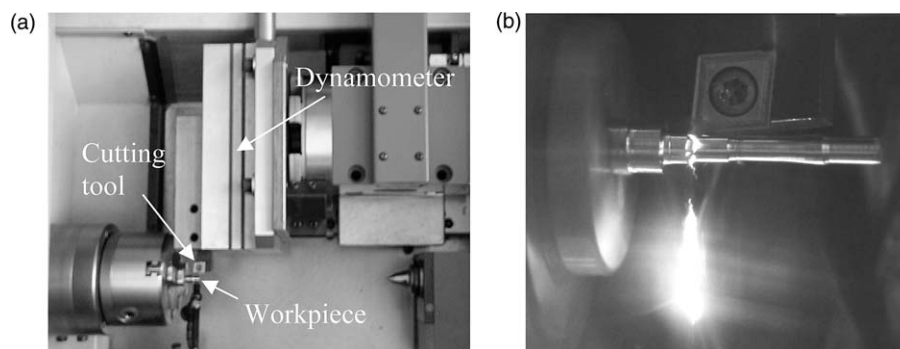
Lathe turning experiment (a) the setup with dynamometer, cutting tool, and workpiece and (b) light emission from machining of BMG.
